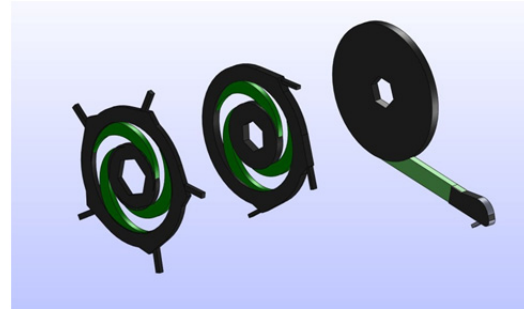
Sprocket prototypes developed for GMMET. Version 1 thru 3 pictured sequentially from left to right.
